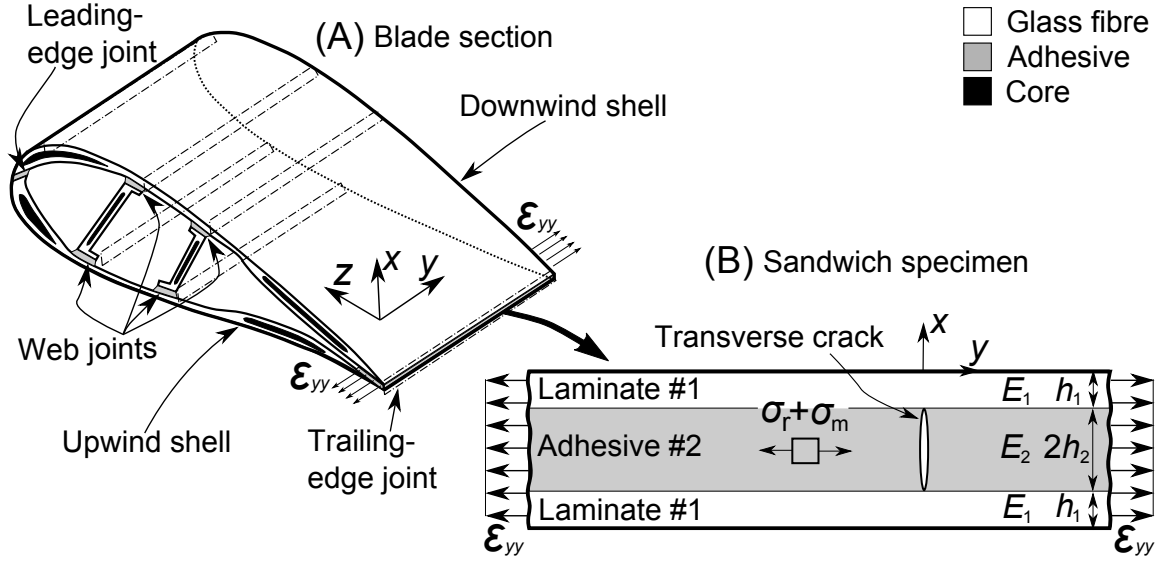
(A) Blade section and adhesive joints. (B) Sandwich specimen loaded in tension.
